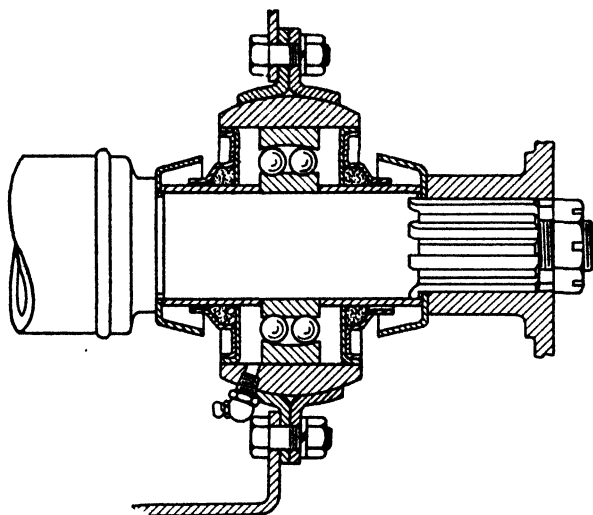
AMIDSHIP BEARING FOR PROPELLER-SHAFT.
